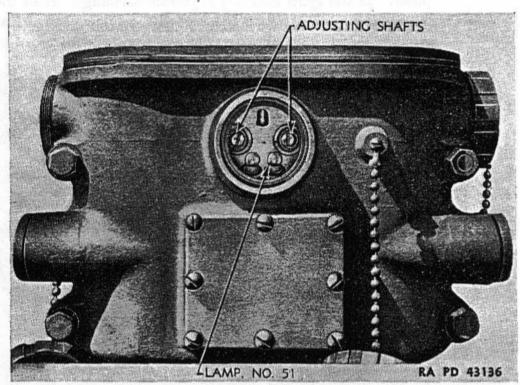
Elevation indicator M5—ready signal lamps and synchronizing adjusting shafts.
